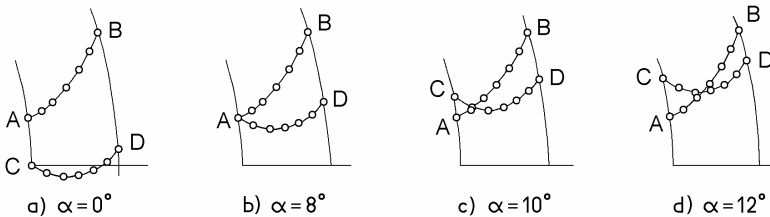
Different positions of the mobile cutting edge referring to the fixed cutting edge
